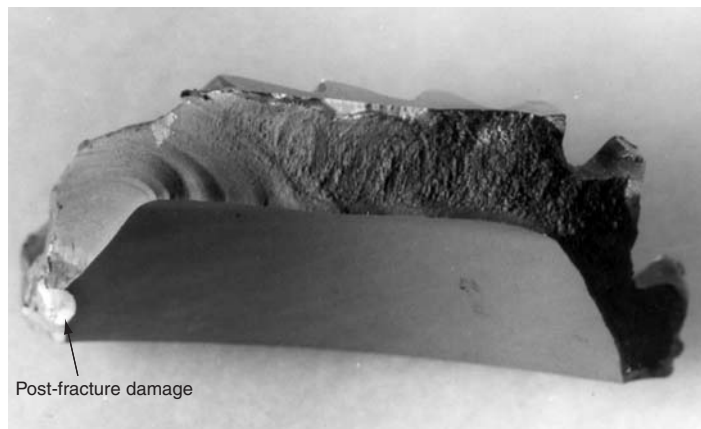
Fractured segment. Note the secondary (post-fracture) damage at the fracture origin.
